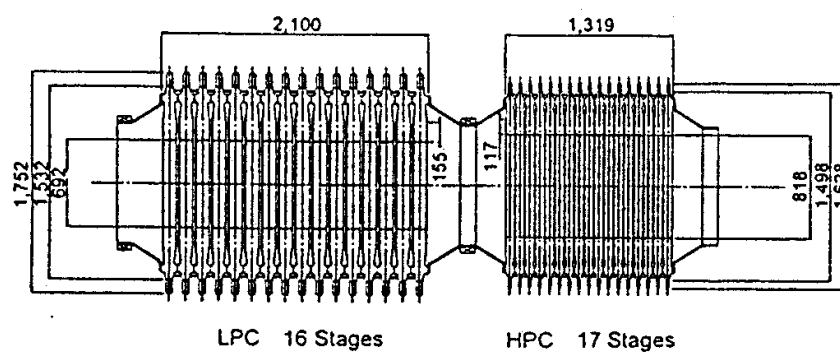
Sectional view of Japanese compressor rotor, Muto (1999).
